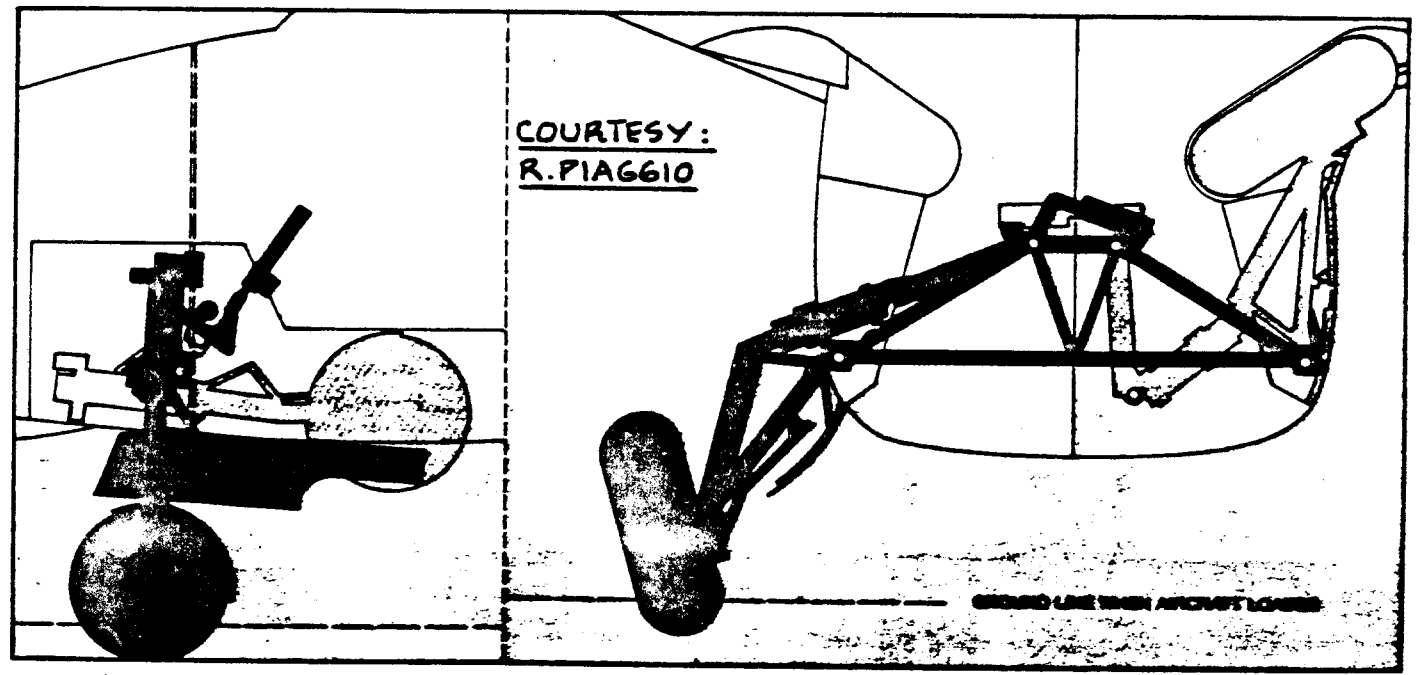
Gear Retraction: Piaggio P.166-DL3
